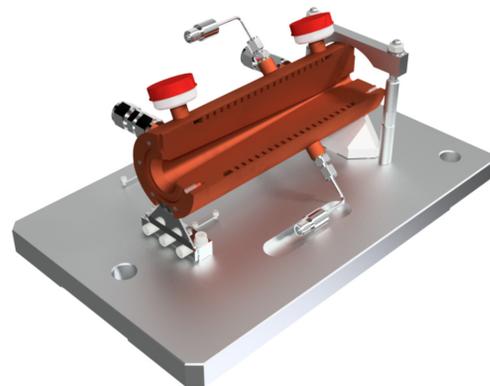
Final component assembly of the fixed mask for undulator-beamline Front-Ends.
